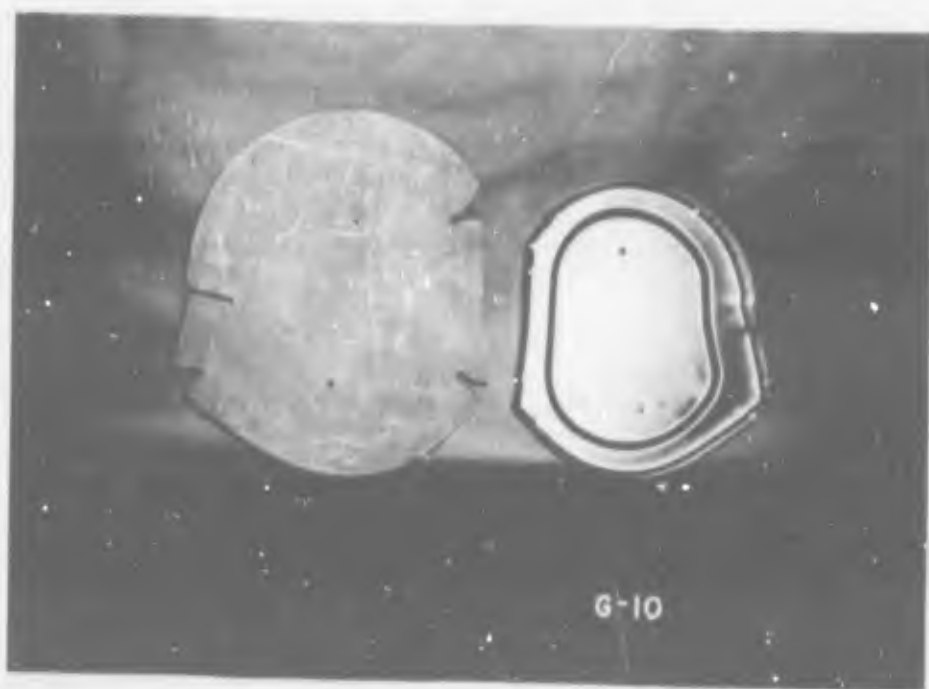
Flat Pattern for Tail Cone Frame (.070" Gauge Material), is Shown at Left. Formed Part, One-Step Method, is Shown at Right
